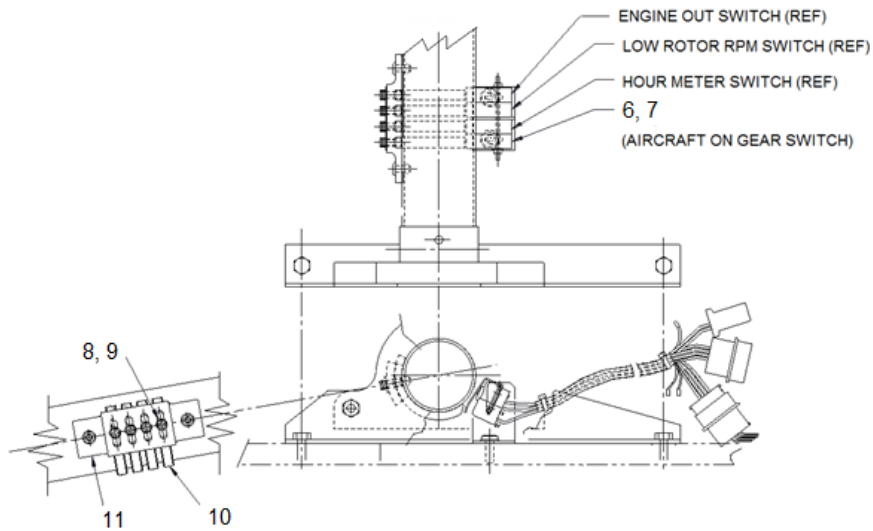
GTN 650/750 Installation – Aircraft on Ground Switch
